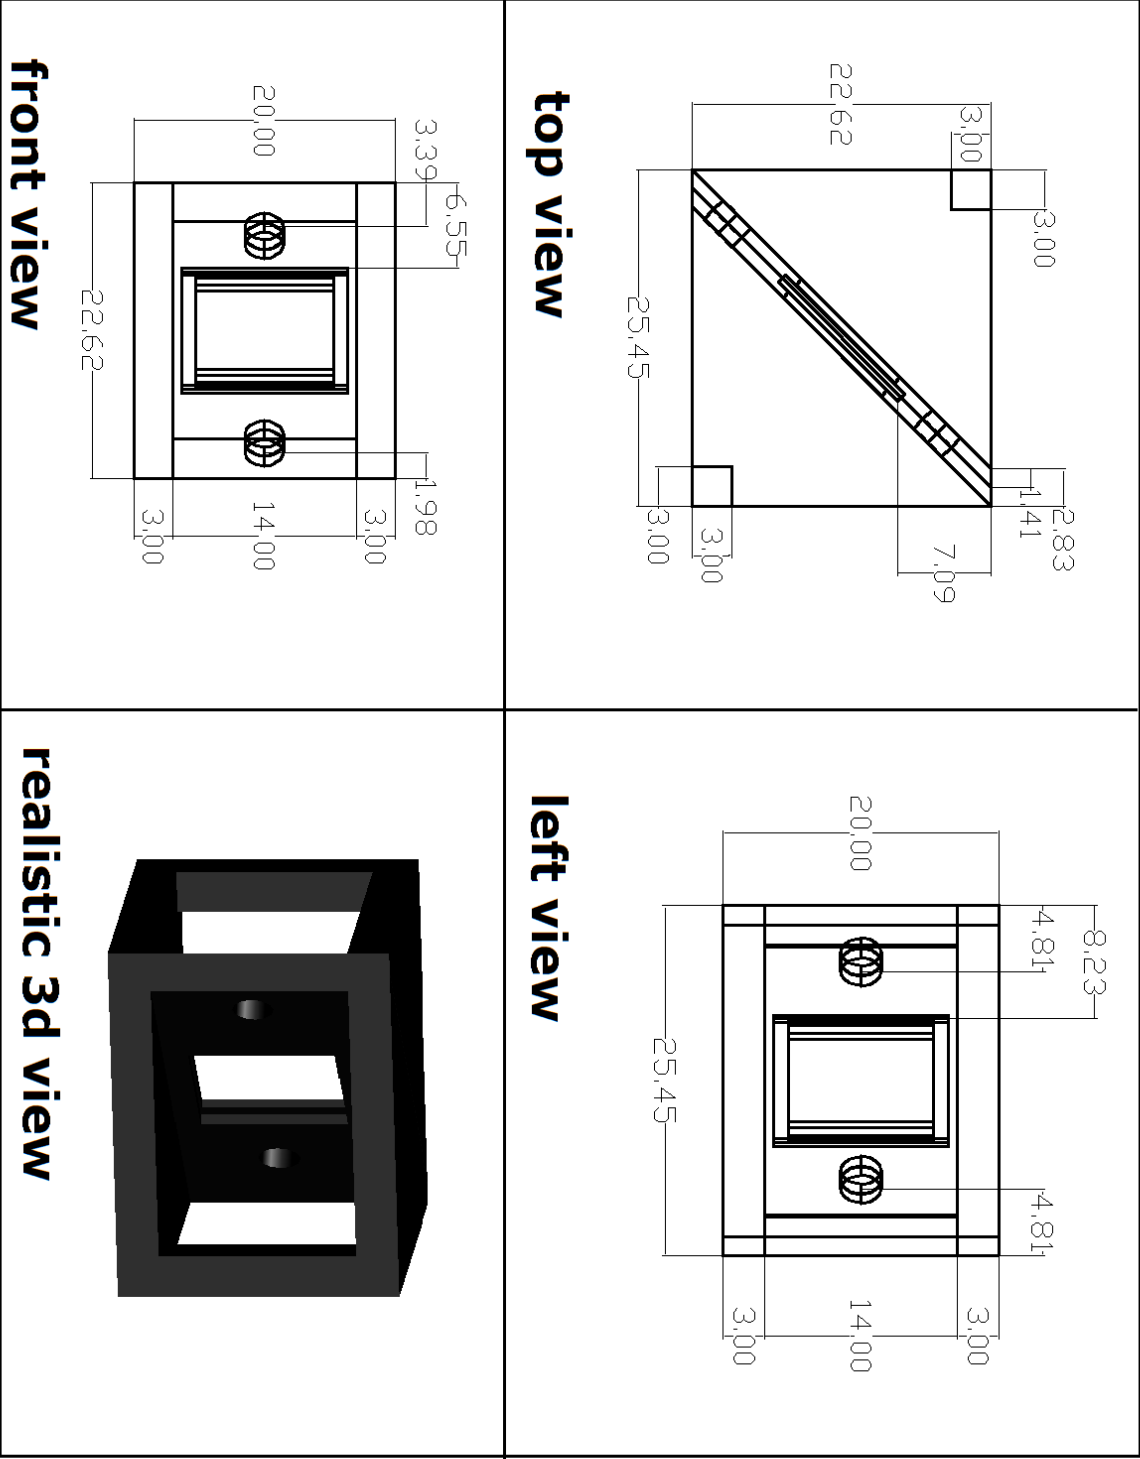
Support for the polarizing beamsplitter. The support consists of 2 parts screwed with in the middle the glass. Dimensions are in millimeters.
